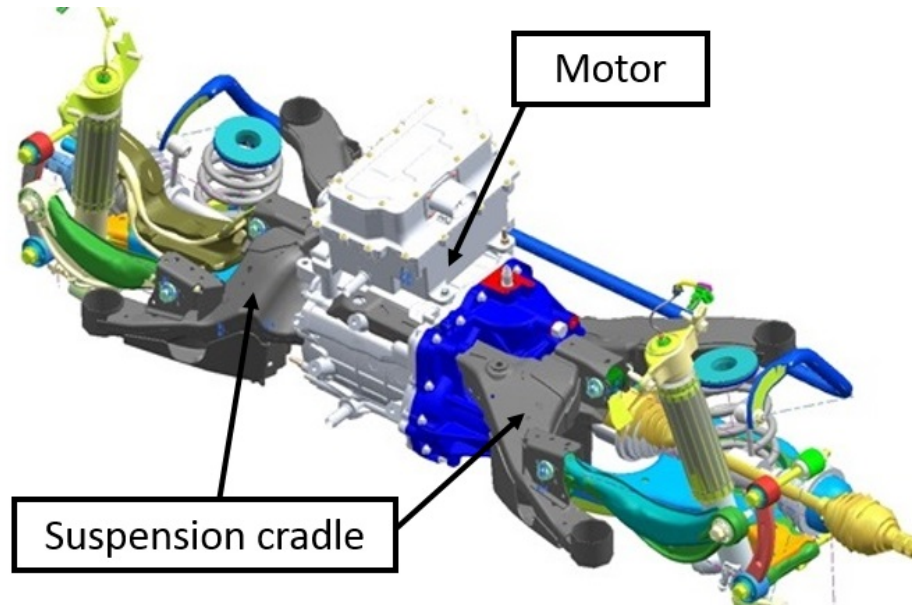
Complete Buick LaCrosse AWD rear suspension with motor in place.
